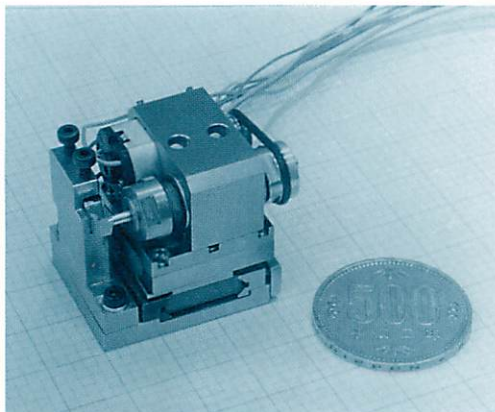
Micro lathe (courtesy of Mechanical Engineering Laboratory)
